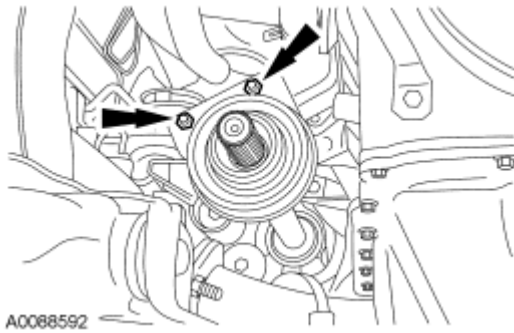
Locating Intermediate Shaft Retaining Nuts
